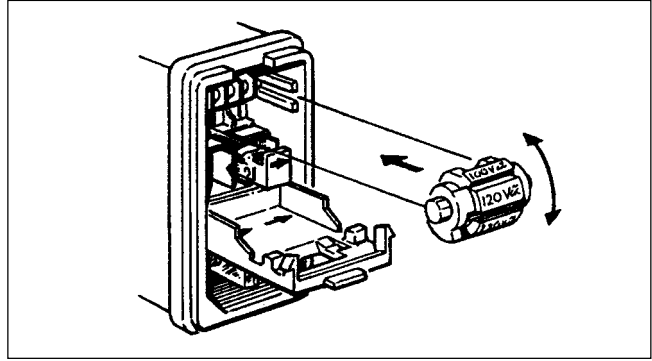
Installing the fuse holder. Always use the hole at the righthand side when you install the fuse holder
